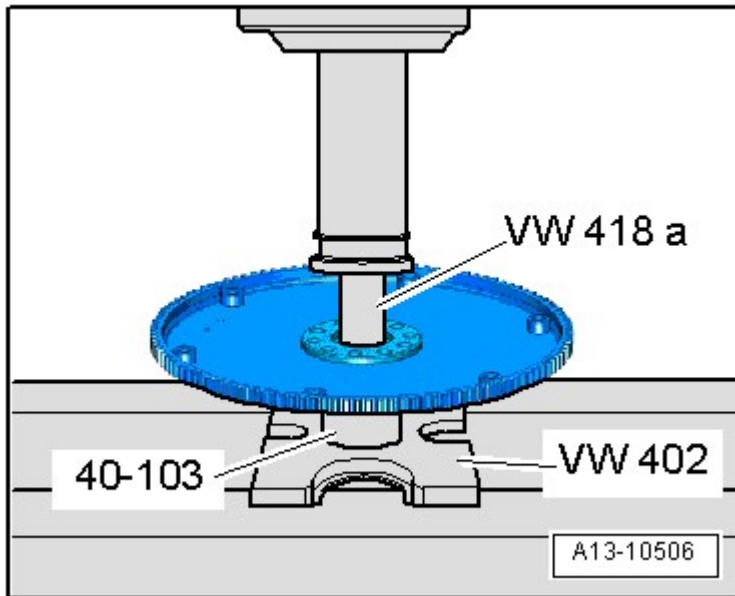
Identifying Special Tools -- Drive Plate Needle Bearing Installation
